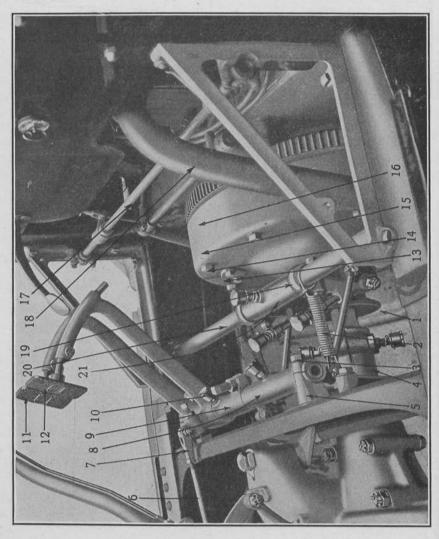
CLUTCH, FLYWHEEL AND PEDAL ASSEMBLIES	f. No. Part No. 0134% GED Ch 0175% GEC Ch S0107% GE Fo	0425 GED	081 GTB 081	01914 GE Foot lever connection. S0192 GA Foot brake lever adjusting	191½ GEC 35½ GEC 00151 GEC S0150½ GEE	150¾ GEC Clutch cover. 150 GEE Clutch flywheel. 0724 GEC Carbureter control shaft. 1081¼ TED Muffler exhaust pipe with flange. 13¾ GTA Clutch rocker shaft collar. 0173 GTB Clutch rocker shaft.
